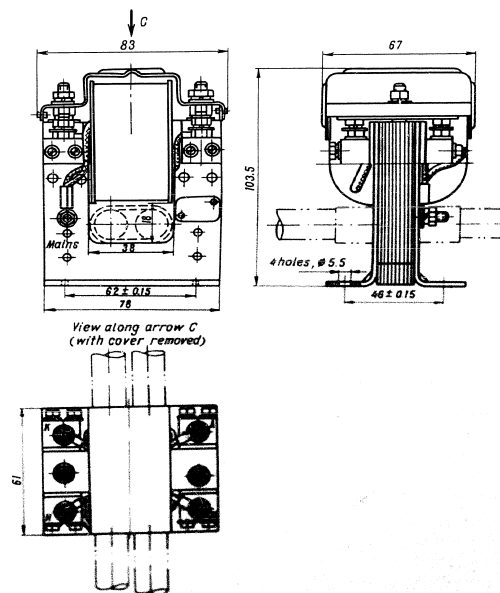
Overall and Installation Dimensions of TC-9A-12 Transformer
